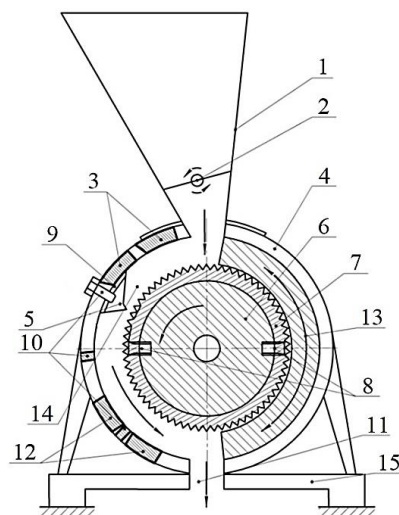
Scheme of a prototype rotary crusher: 1 – receiving hopper; 2 – damper; 3 – plugs in add. places of loading window; 4 – a stator; 5 – cutting element; 6 – a rotor; 7 – a removable surface of a rotor; 8 – fastenings of a surface of a rotor; 9 – a lining for variation of a backlash; 10 – fastening and caps in add. locations of the counter-blade; 11 – discharge hopper; 12 – plugs in add. places of unloading; 13 – limiting lip; 14 – crushing chamber; 15 – frame.
